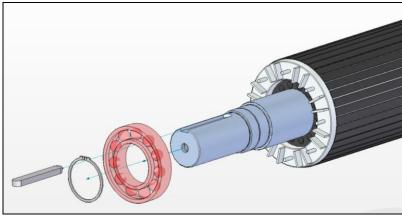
Replacing bearings on MAC R motors (steps 6 and 7)
